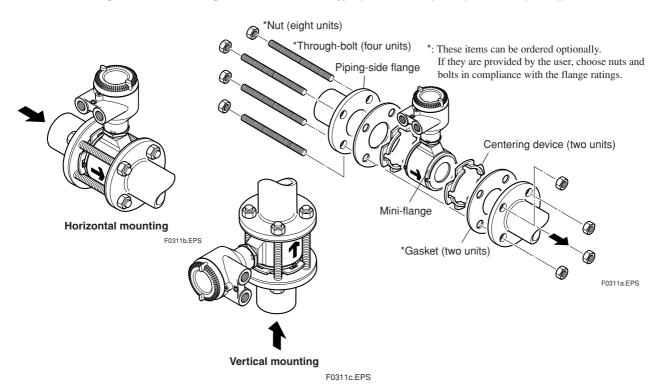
Mounting Procedure for Wafer Type (size: 25 mm (1.0 in.), 32 mm (1.25 in.), and 40 mm (1.5 in.))
